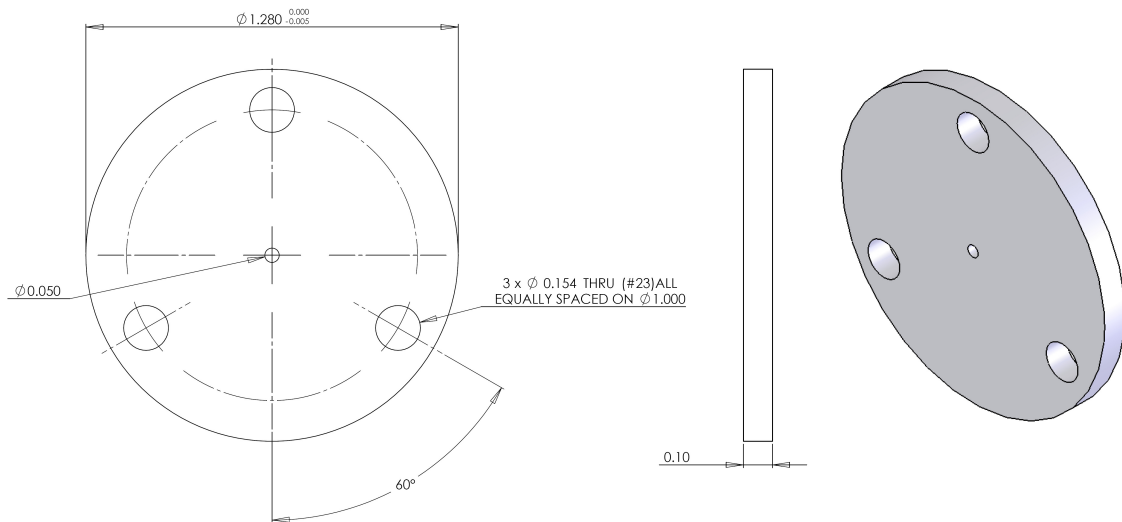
Technical drawing of one of the two RFA removable slit plates. All measurements are in inches
